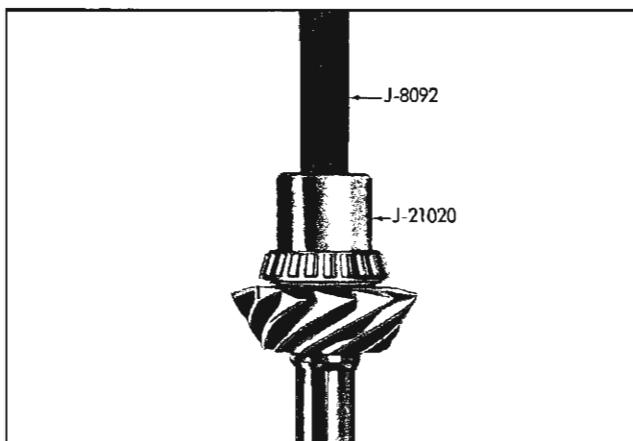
Tool Positioned to Install Rear Pinion Bearing
